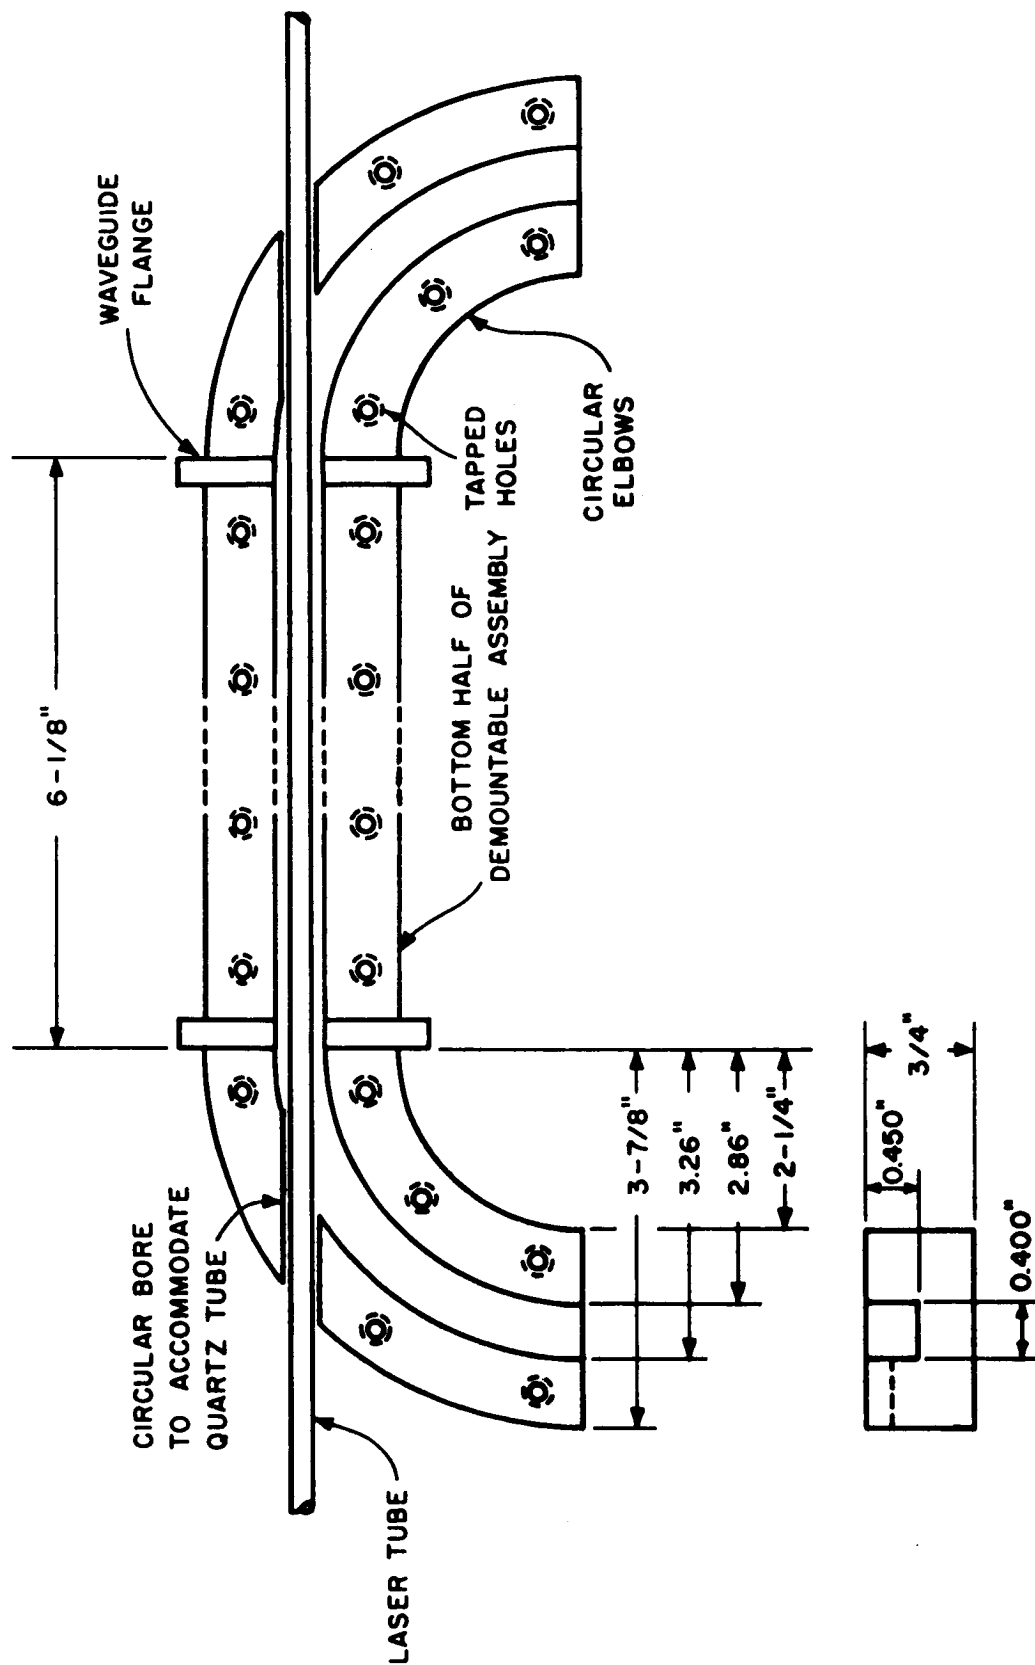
Bottom half of demountable section of X-band waveguide, showing position of laser tube within the guide assembly.
